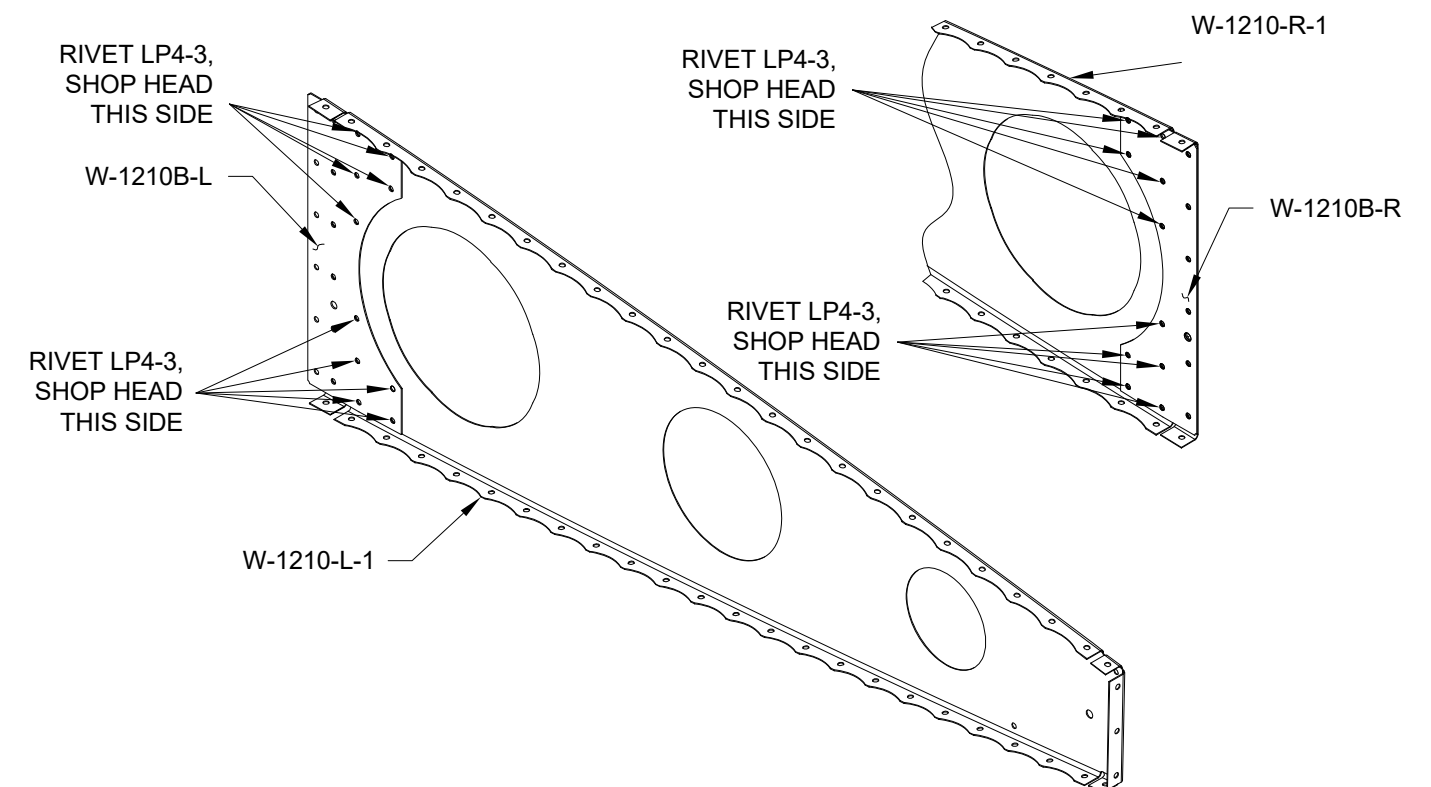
RIVETING THE RIB DOUBLERS TO THE MAIN RIBS
